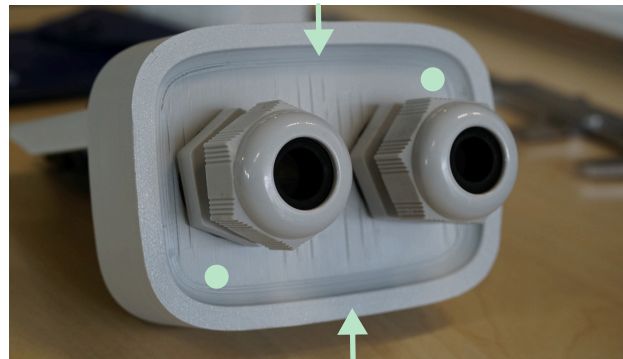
Locking places mechanism (arrows) and possible locking places (circles)
